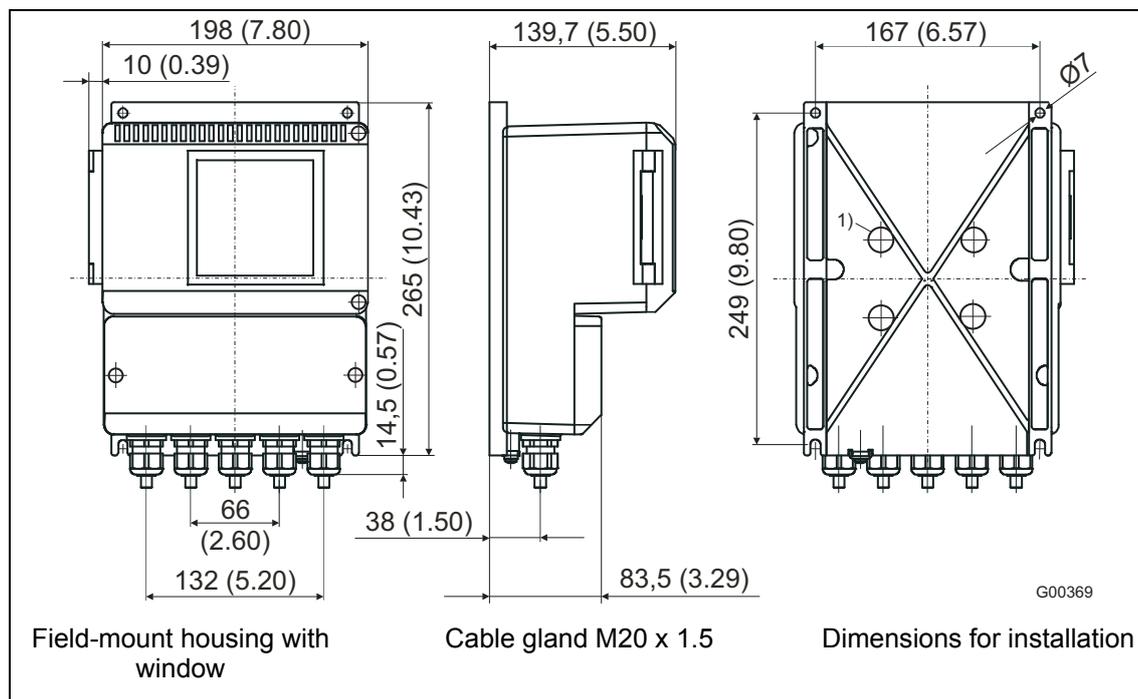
Dimensions of ME21/22/23/24/25 transmitter housing
